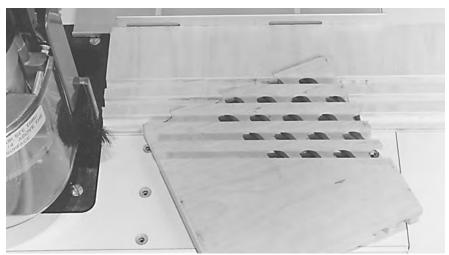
To make straight, diagonal cuts across the surfaces of projects, attach your workpiece to a fixture at an angle and guide it against the fence.
